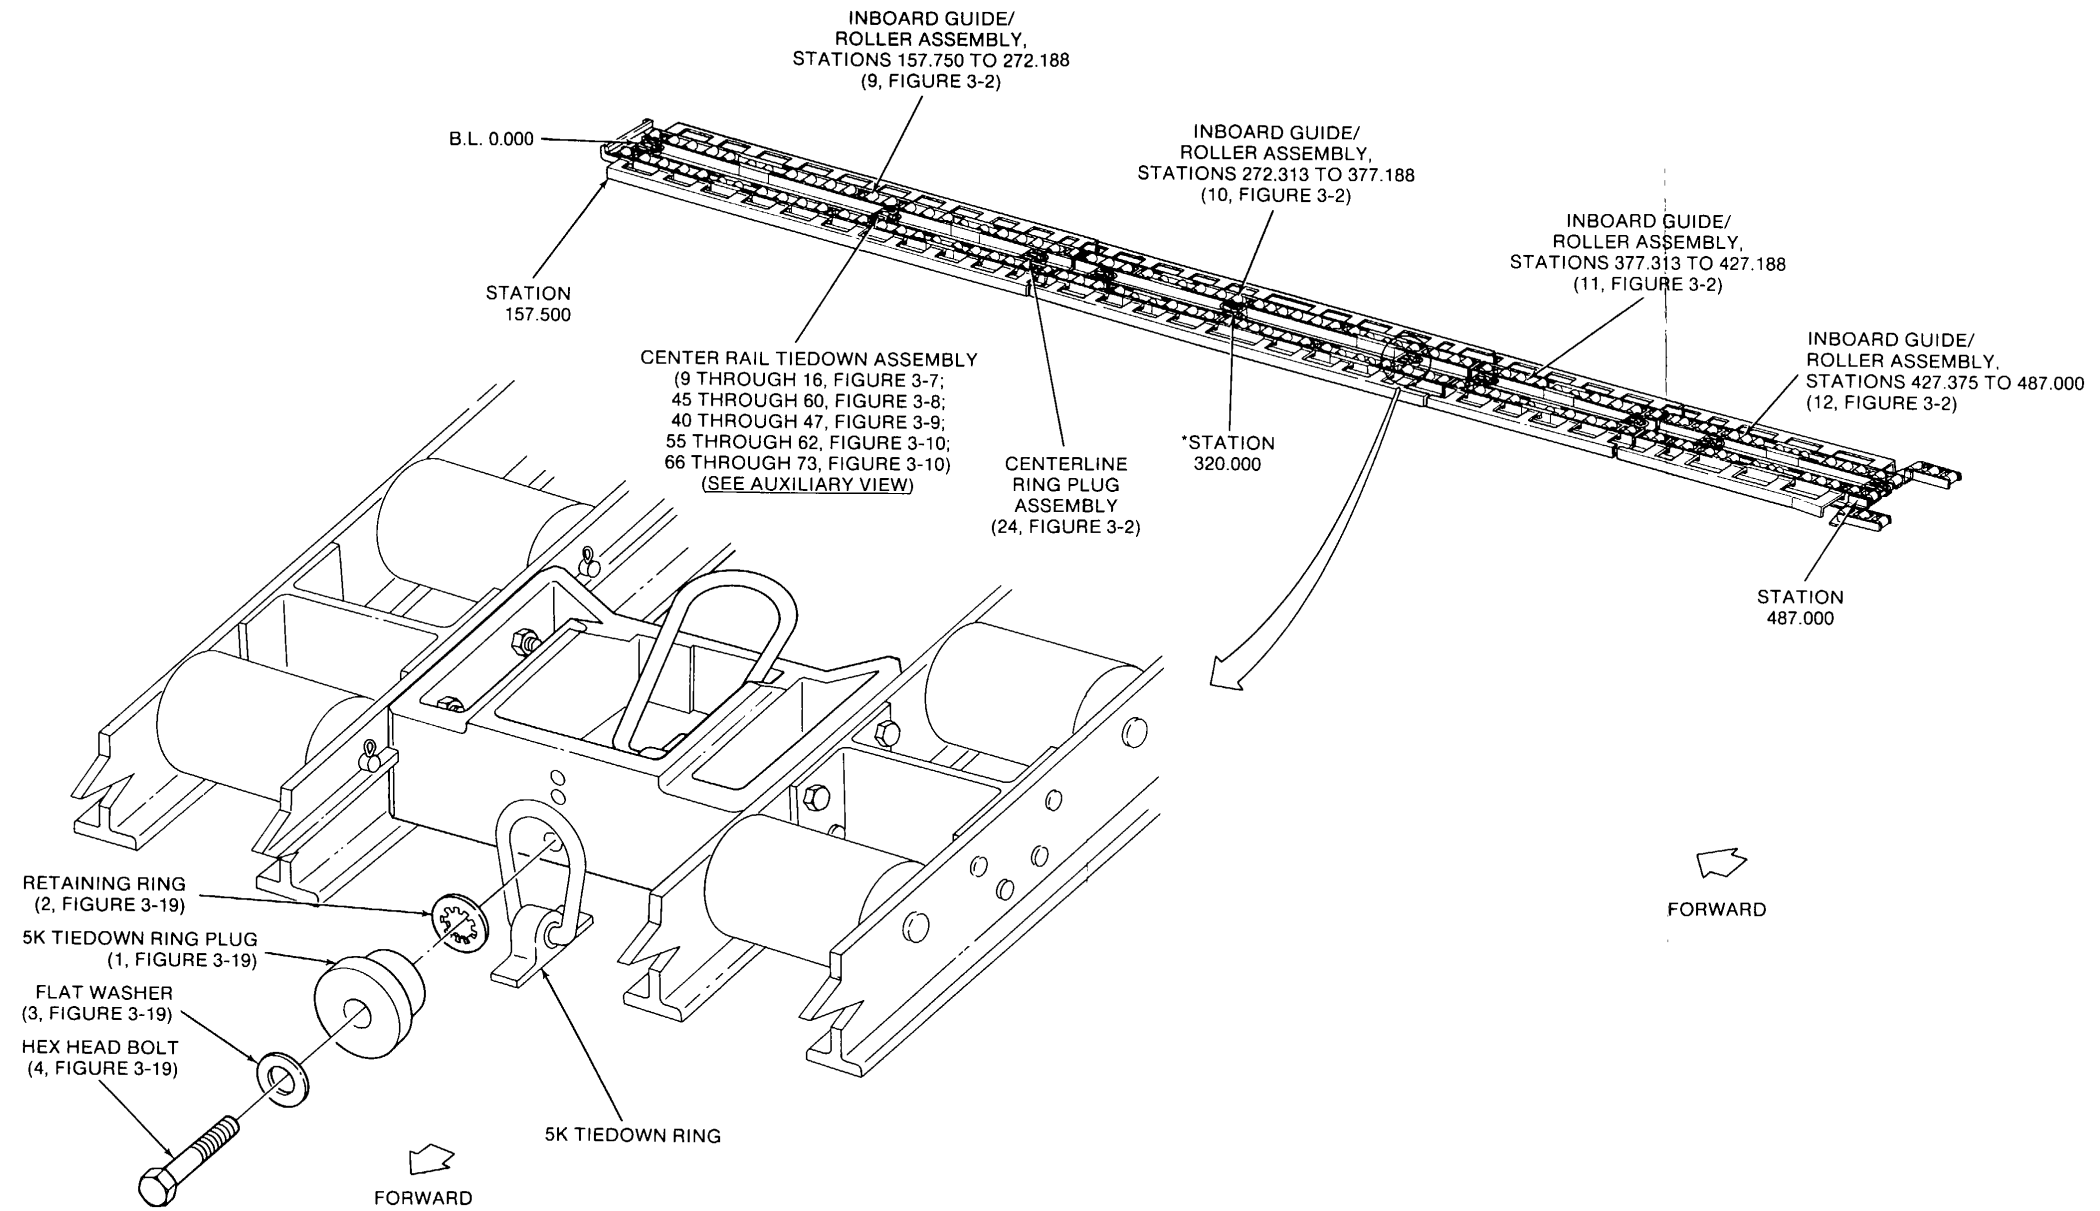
Installing Inboard Guide/Roller Assemblies
